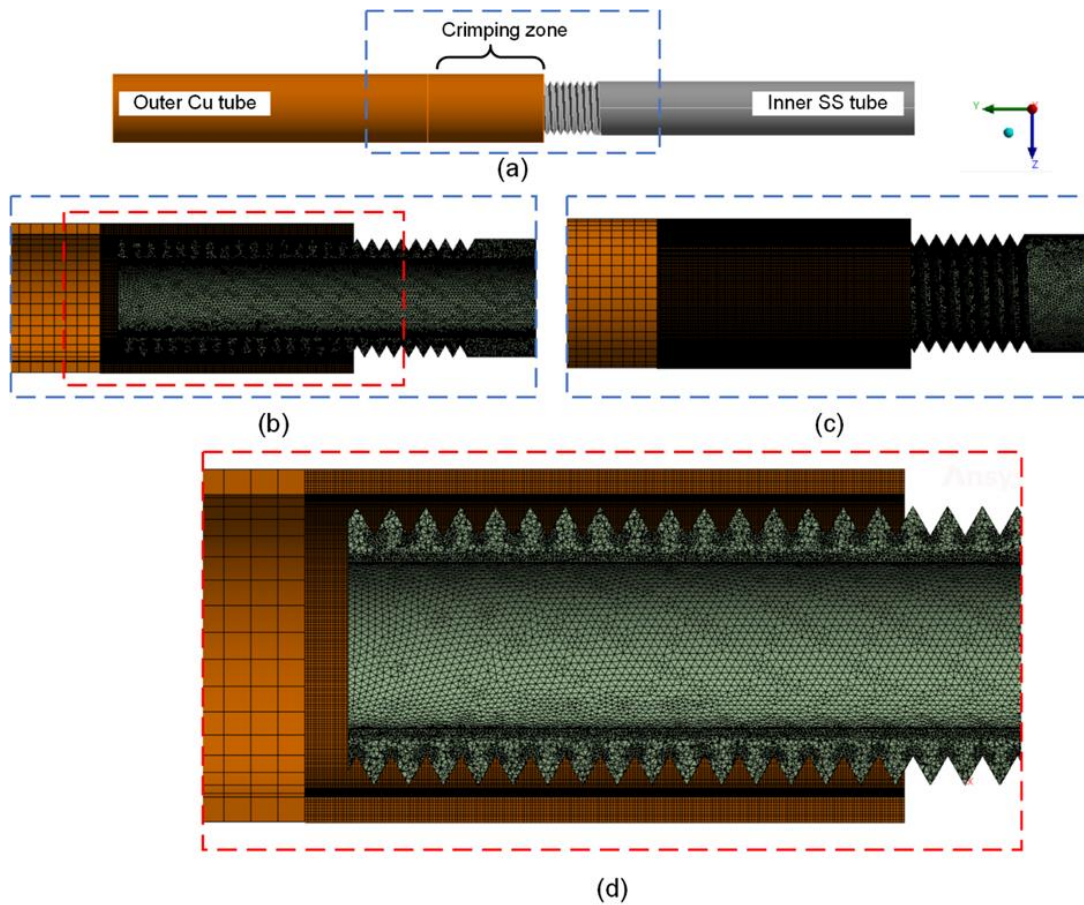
(a) 3D Cu-SS tube-to-tube assembly, (b) front sectional view of the meshed model, (c) back sectional view of the meshed model and (d) zoomed view of the meshing
